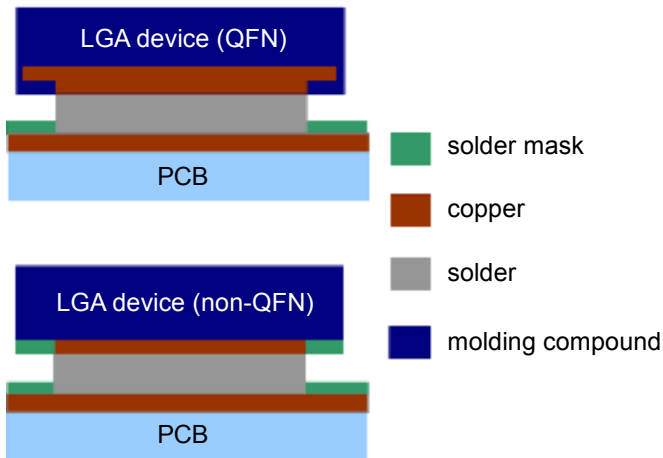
Recommended solder mask openings – LGA devices, QFN (Quad Flat No-Lead) and non-QFN
